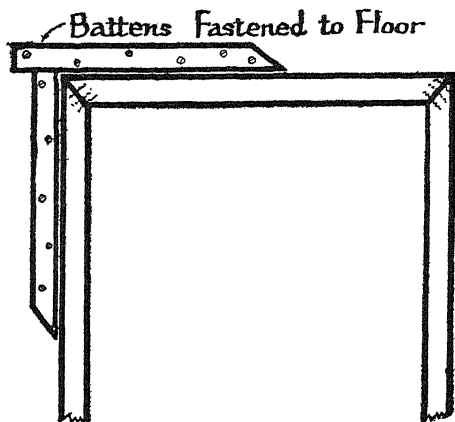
RIGHT ANGLE TO HOLD FRAME.
